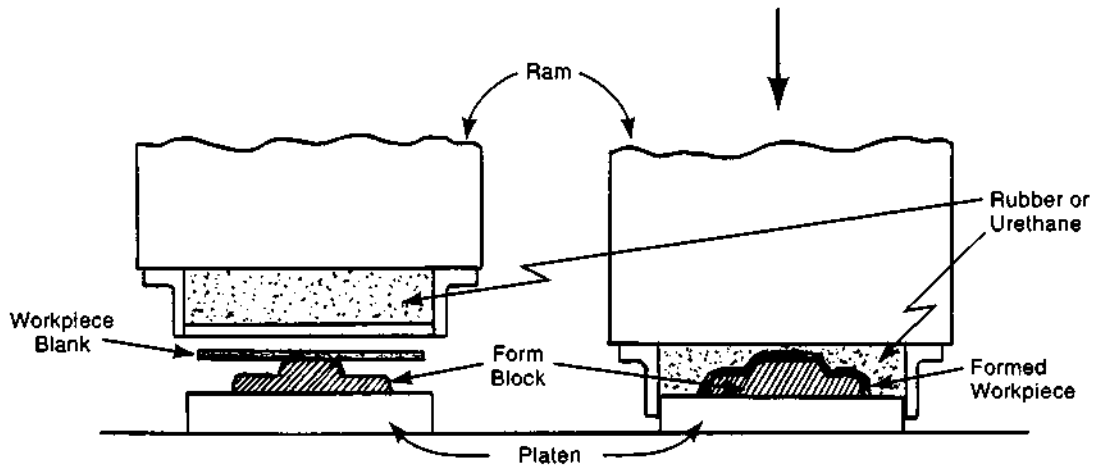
D3b The Guerin process for rubber tool forming. The rubber takes the place of one half of the forming die that would otherwise be required.
